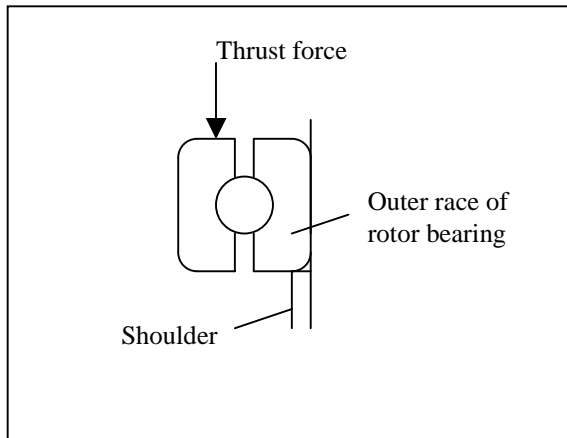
Schematic of the connection between the back rotor bearing and its supporting should.
